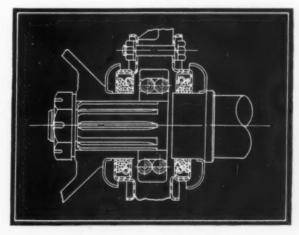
Material in oil seal is pressed against shaft by a garter spring
